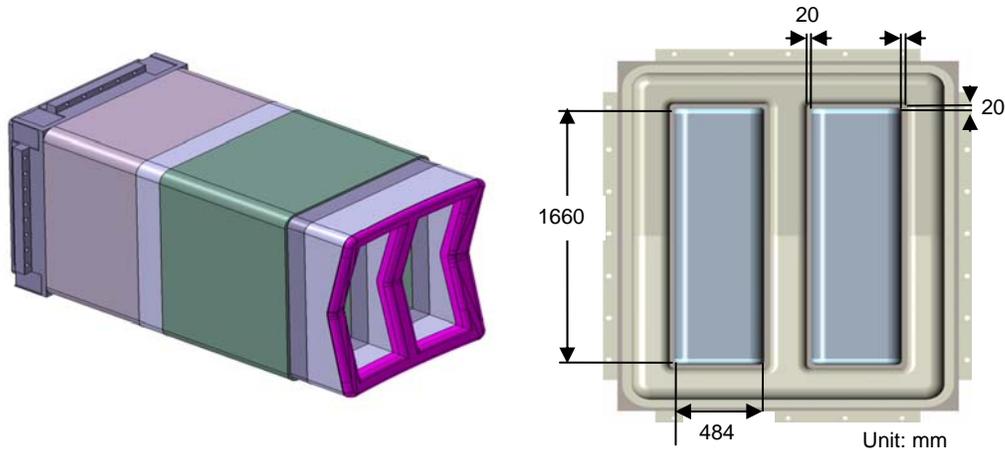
Views of a vertically divided test blanket frame, isometric (left), and front view with dimensions (right)
